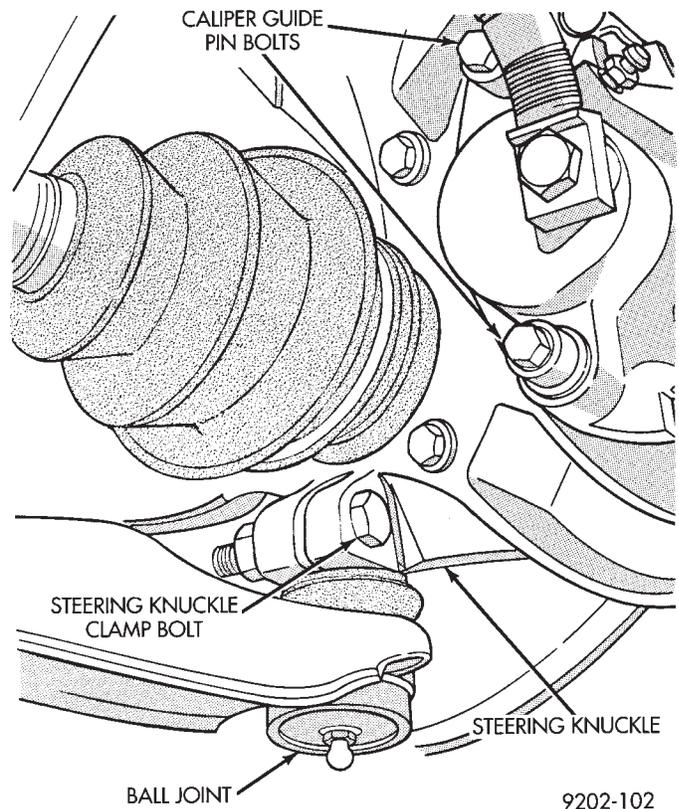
Remove Clamp Bolt and Caliper Guide Pins
